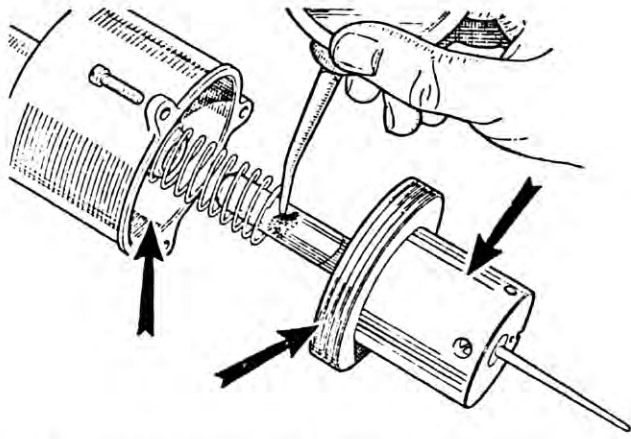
Oil only piston rod. Surfaces at arrows must be clean and oil-free.
